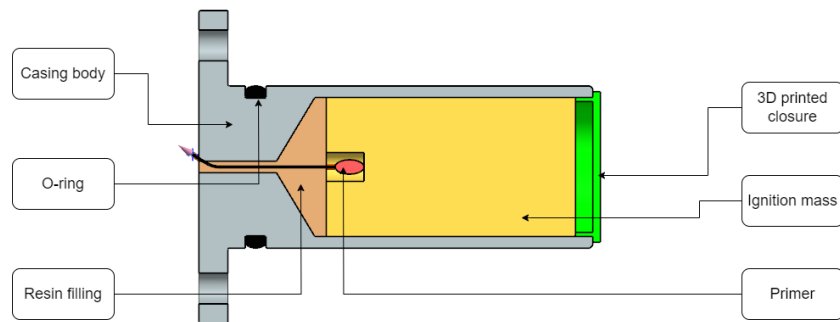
Cross sectional view of the Grot 2 motor igniter assembly
